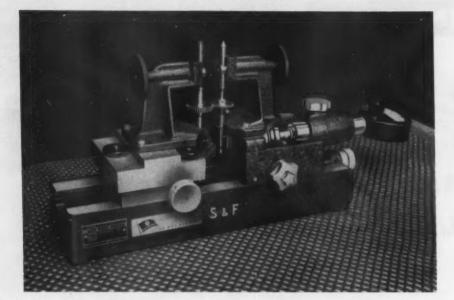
A gear roll tester equipped with mounting centers and means for adjusting gear-axis alignment. Work gear (right) is wrung onto a center-mounted arbor.
